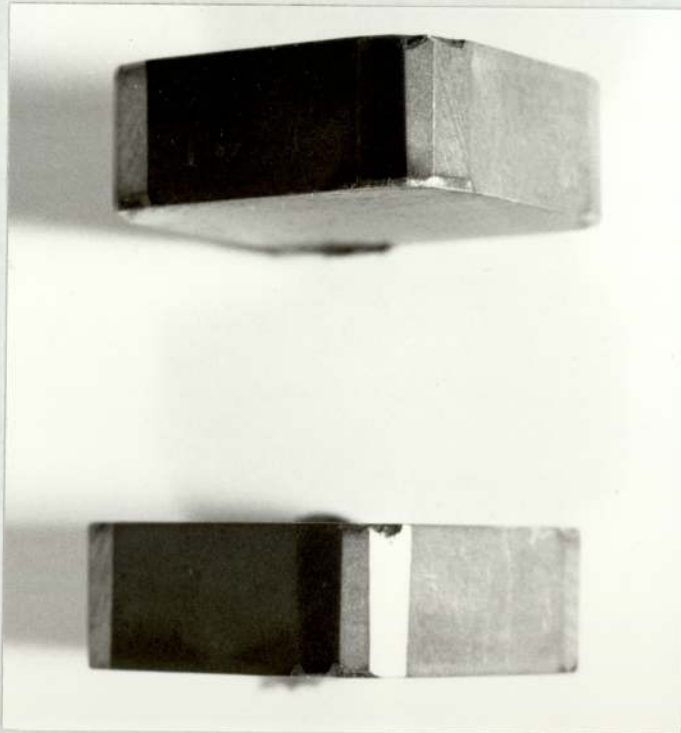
Chipping of Cutting Edges in Up-Cut Milling
